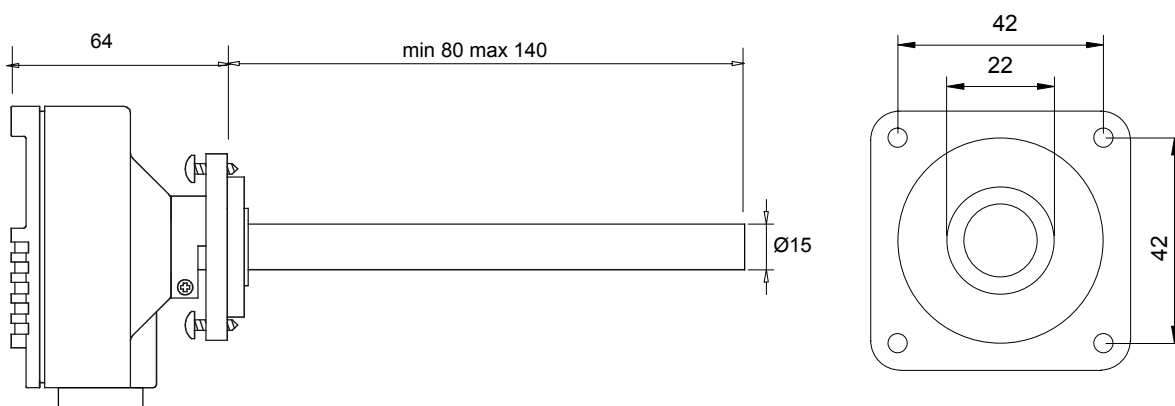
Dimensions of the GMD20 and the mounting plate (in mm)
